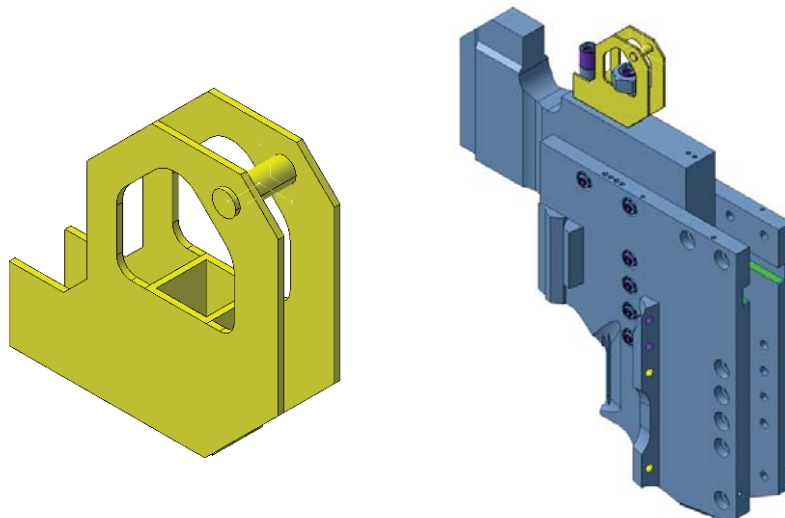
Design of a possible form of the handling equipment for the upper subassembly of the C-frame.
